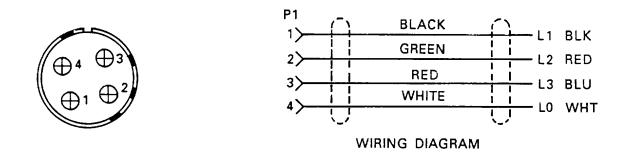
Cable Assembly SM-D-744664 (25 ft.).
